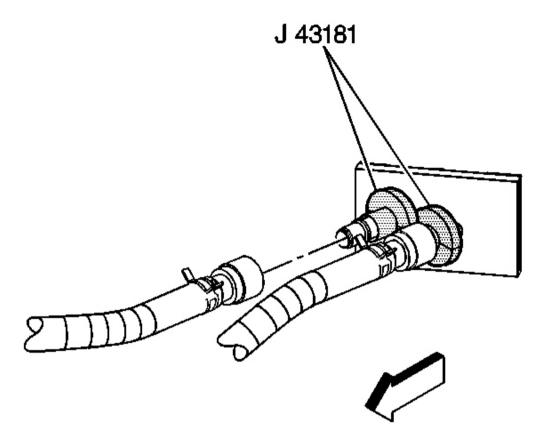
Identifying Heater Hose To Heater Core Outlet Courtesy of GENERAL MOTORS CORP.
